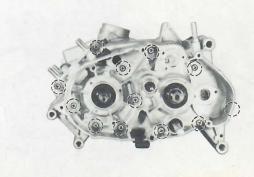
Loosening left crankcase fitting screws with cross head screw driver
